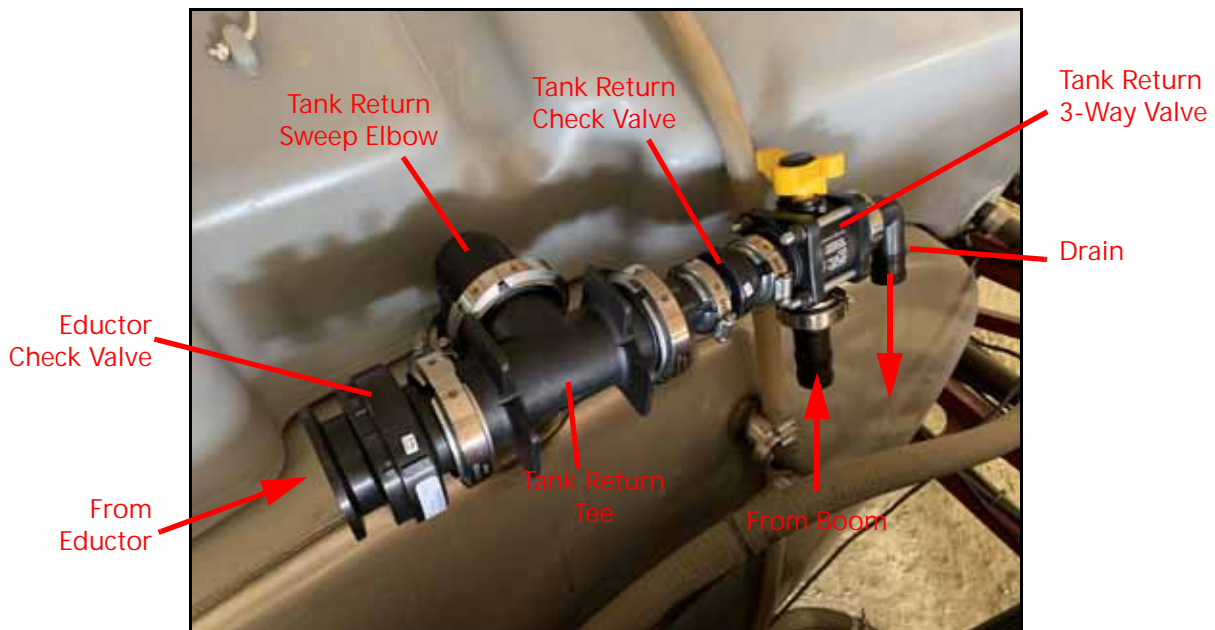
Assembly of Tank Return Tee and Check Valves
